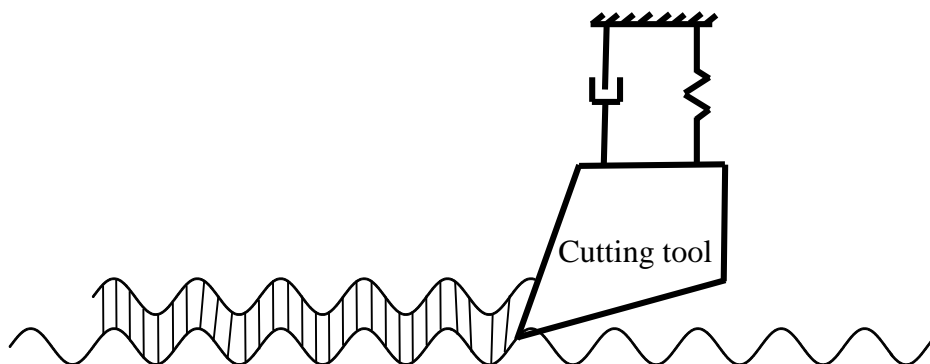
Waves left on workpiece surface at lower surface cutting speeds have a shorter wavelength.
